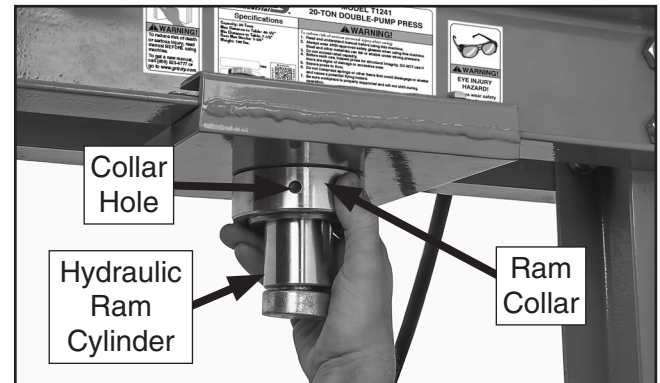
Securing hydraulic ram to mounting plate with ram collar.
